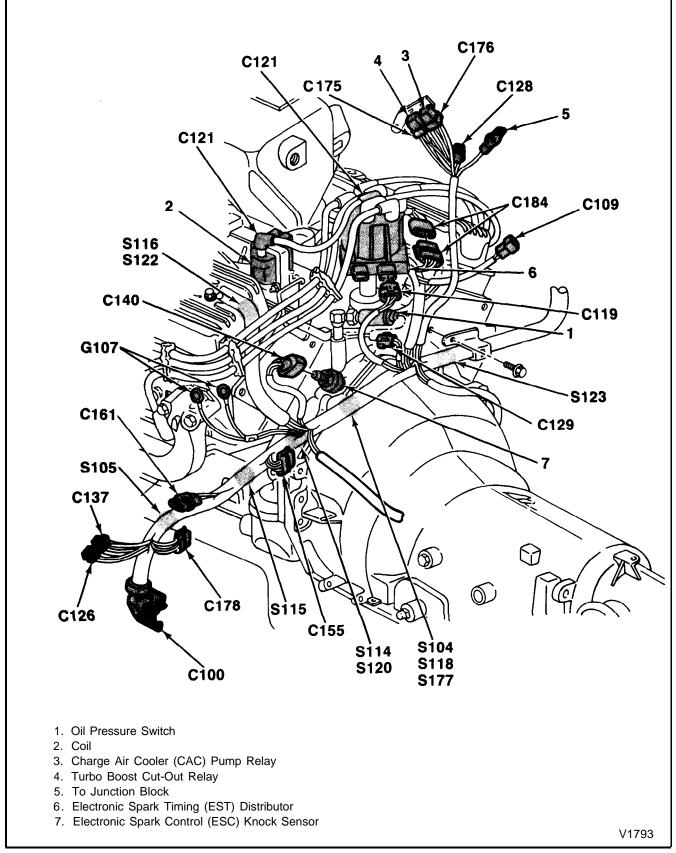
Rear Engine Harness-4.3L Turbo (Syclone and Typhoon)
